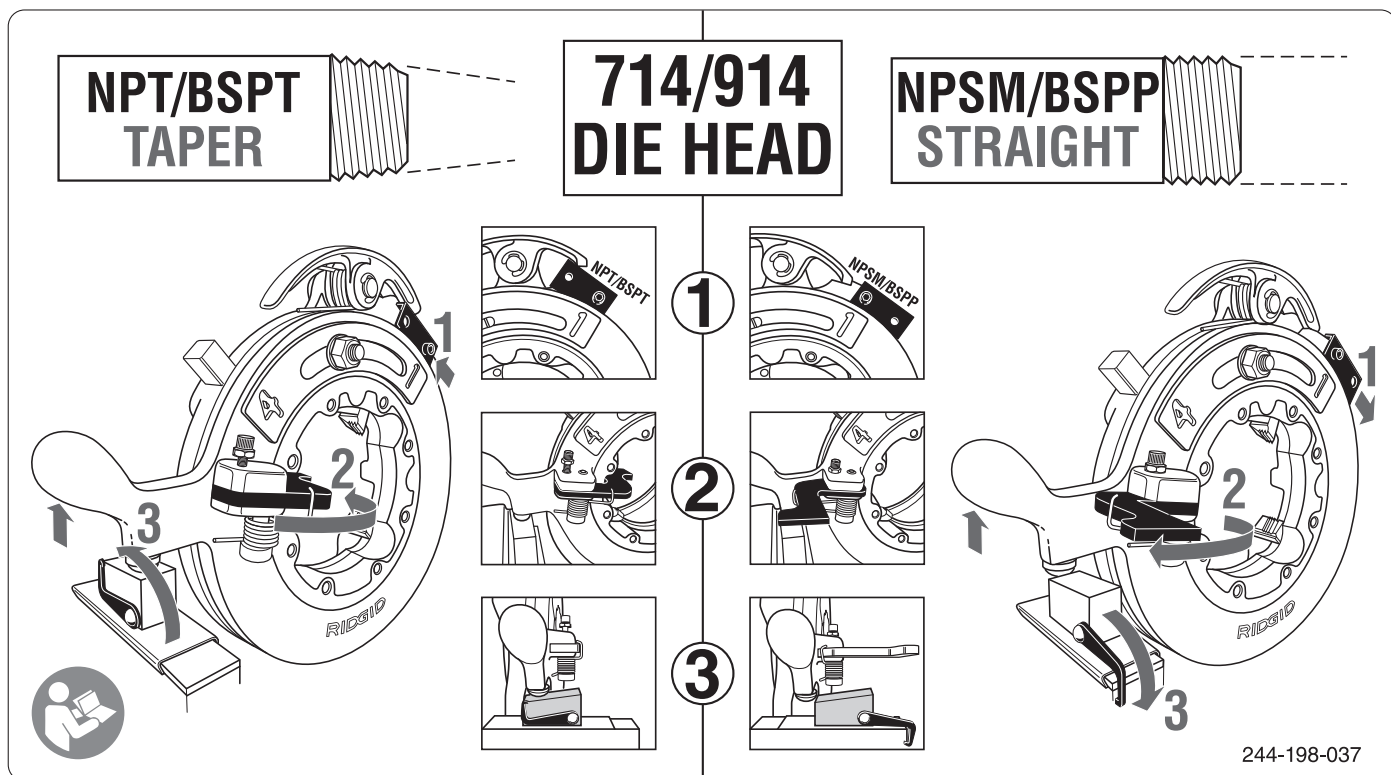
Adjusting for Tapered or Straight Pipe Threads
